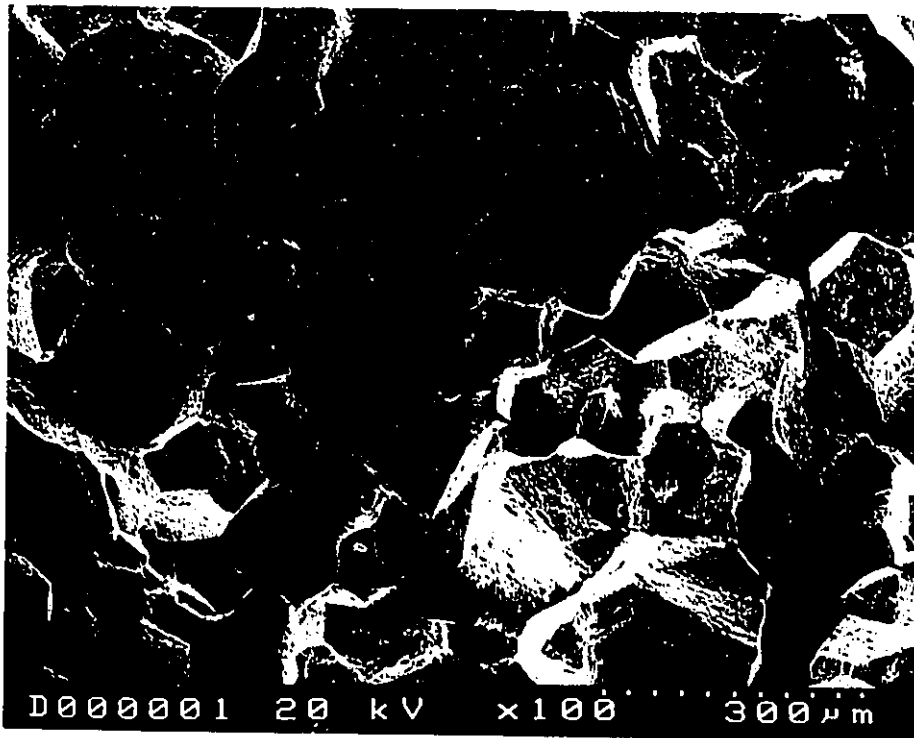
SEM Fractograph of Specimen 2 (Brittle Fracture Zone)
